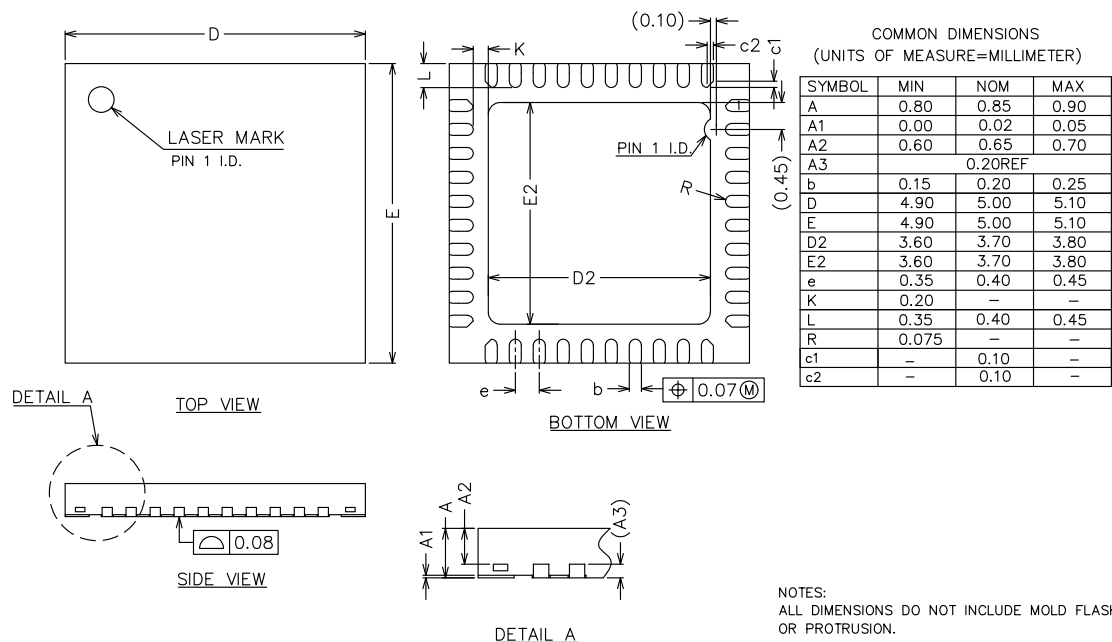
UC6580A-00 (QFN40 Automotive) Mechanical Dimensions
